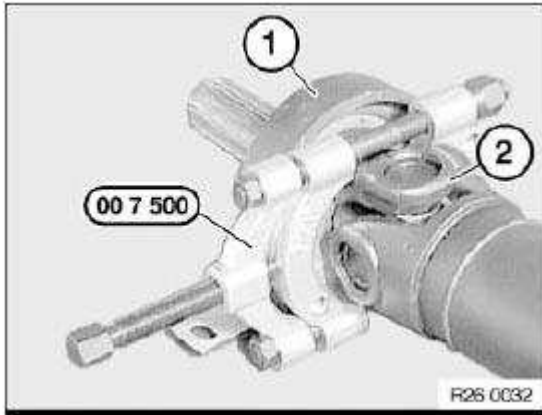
Special Tool (00 7 500), Center Bearing And Universal Joint
